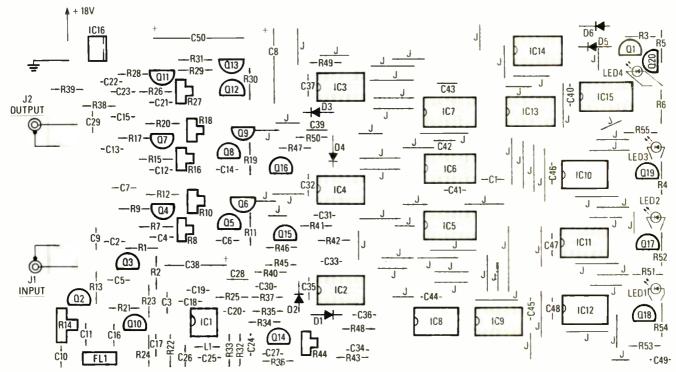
IF YOU CHOOSE TO BUILD an experimental descrambler, a PC pattern is provided in PC Service. Use this guide when mounting parts on the board.
